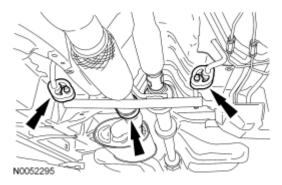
Locating Exhaust Flexible Pipe Clamp & Exhaust Hangers Courtesy of FORD MOTOR CO.
